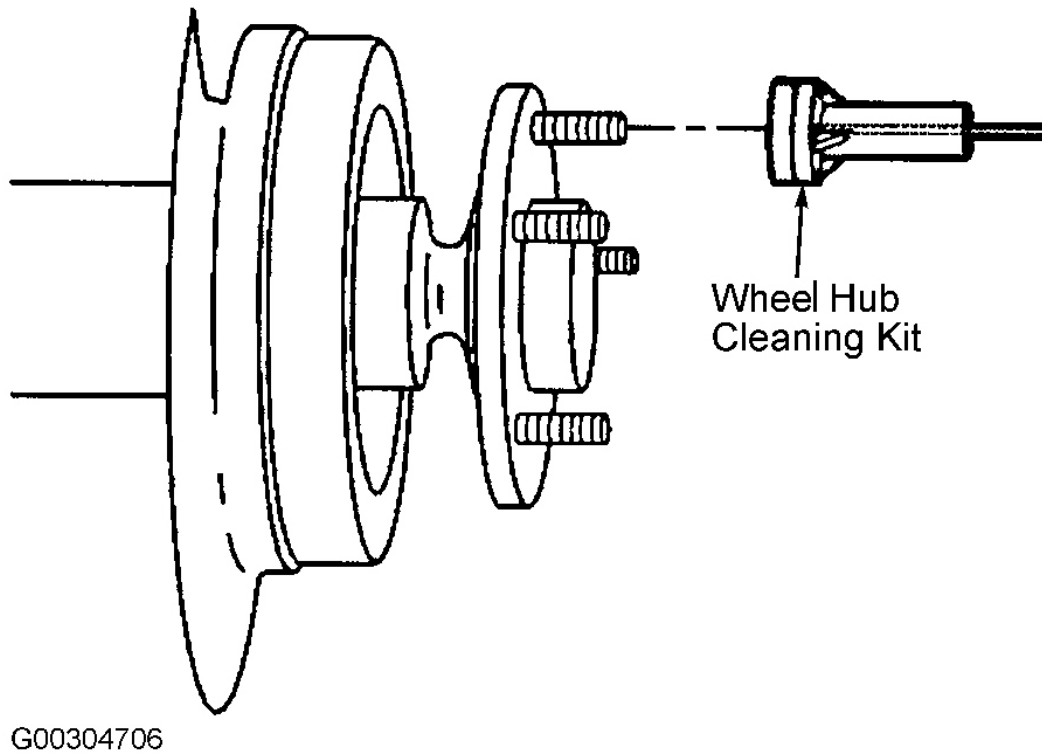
Using Wheel Hub Cleaning Kit On Rear Brake Rotor
